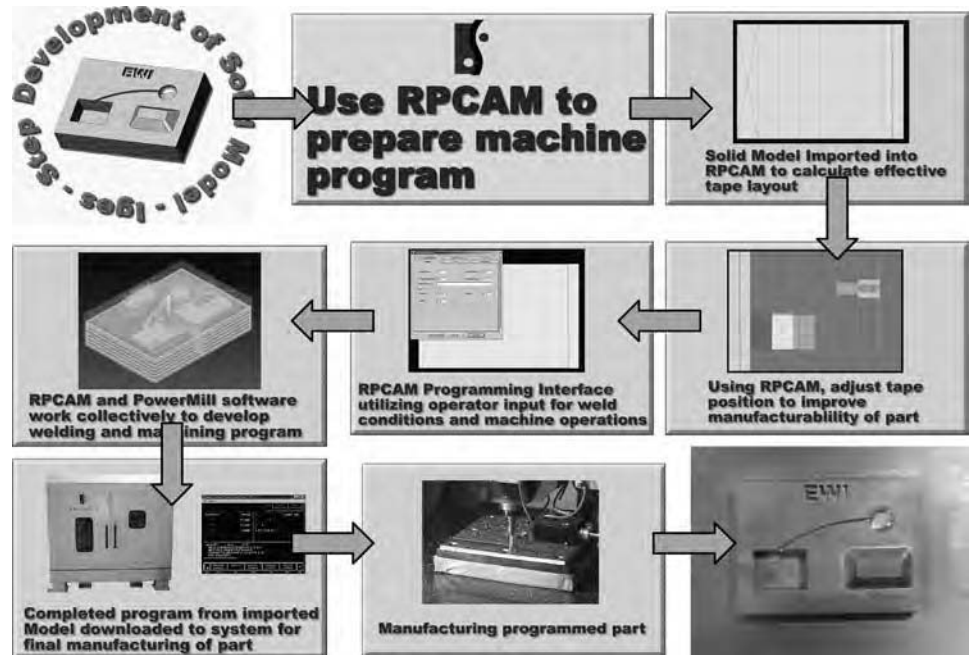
The ultrasonic additive manufacturing process for producing a solid metal part. Photos 1, 3, 5, 6, and 9 courtesy of Edison Welding Institute; photos 2, 4, 7, and 8 courtesy of Solidica Inc.
